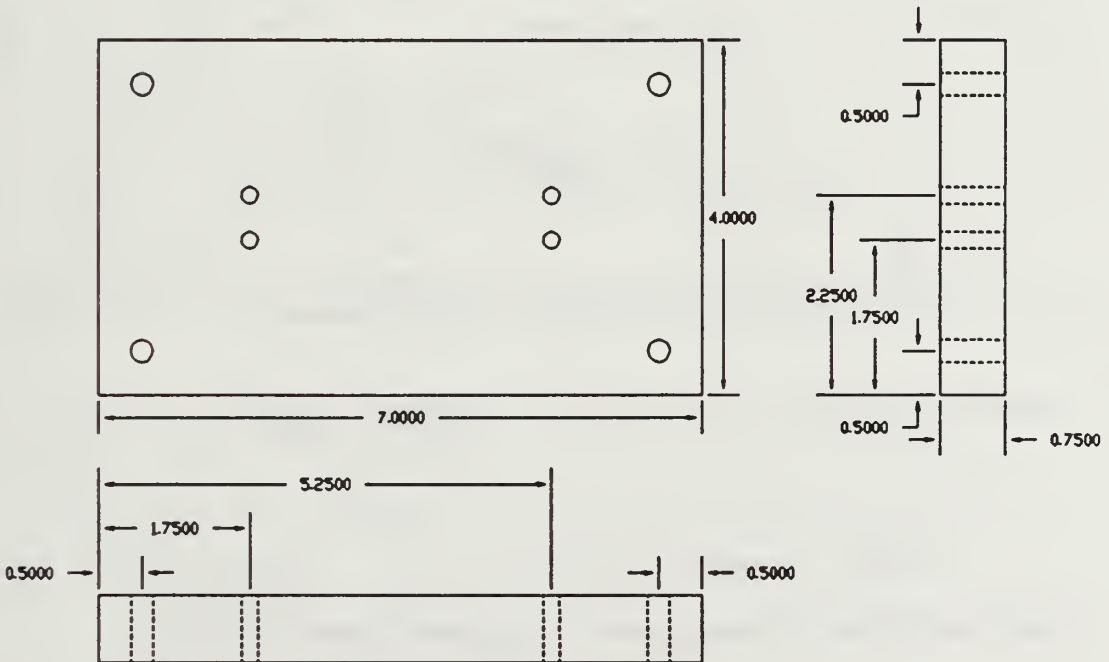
Pattern for molding castable ceramic to hold specimen. One required.
